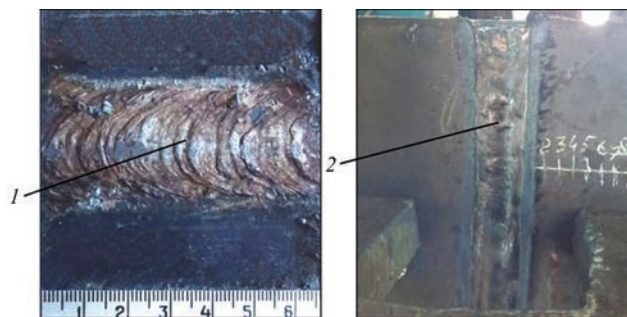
Appearance of welds, produced by welding with forced formation: 1, 2 — rewelded specimens of 12 and 20 mm thick, respectively
